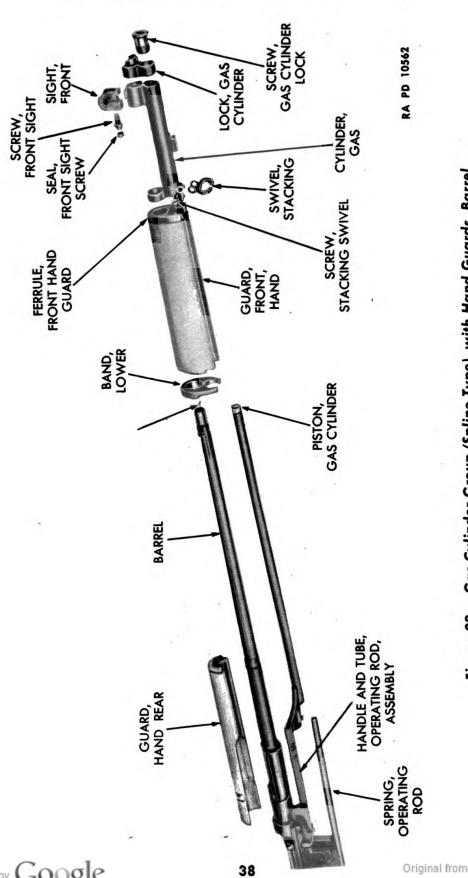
Gas Cylinder Group (Spline Type), with Hand Guards, Barrel and Operating Rod Assembly — Exploded View
